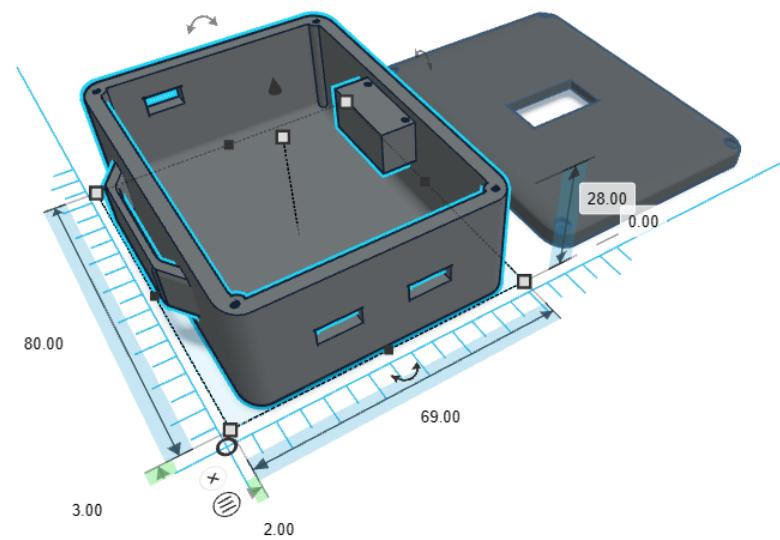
Version 2 (Final) of the 3D Printed Casing
